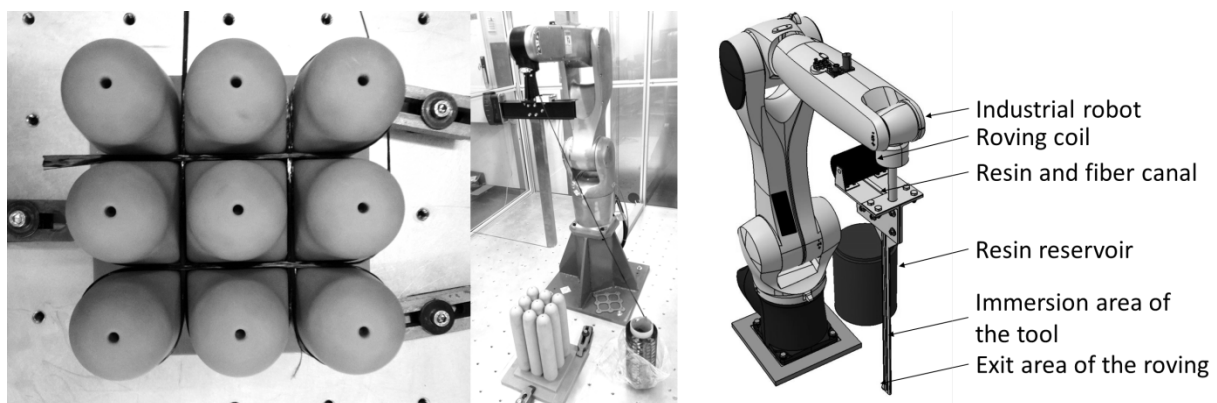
3D-winding tool designed and first 3D-layup on the mock-up is shown
